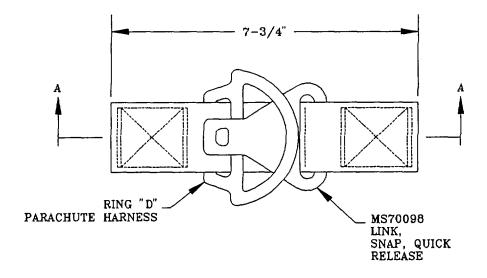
(AT4 Pack) Pocket Assembly Lowering (Sheet 2 of 2)
